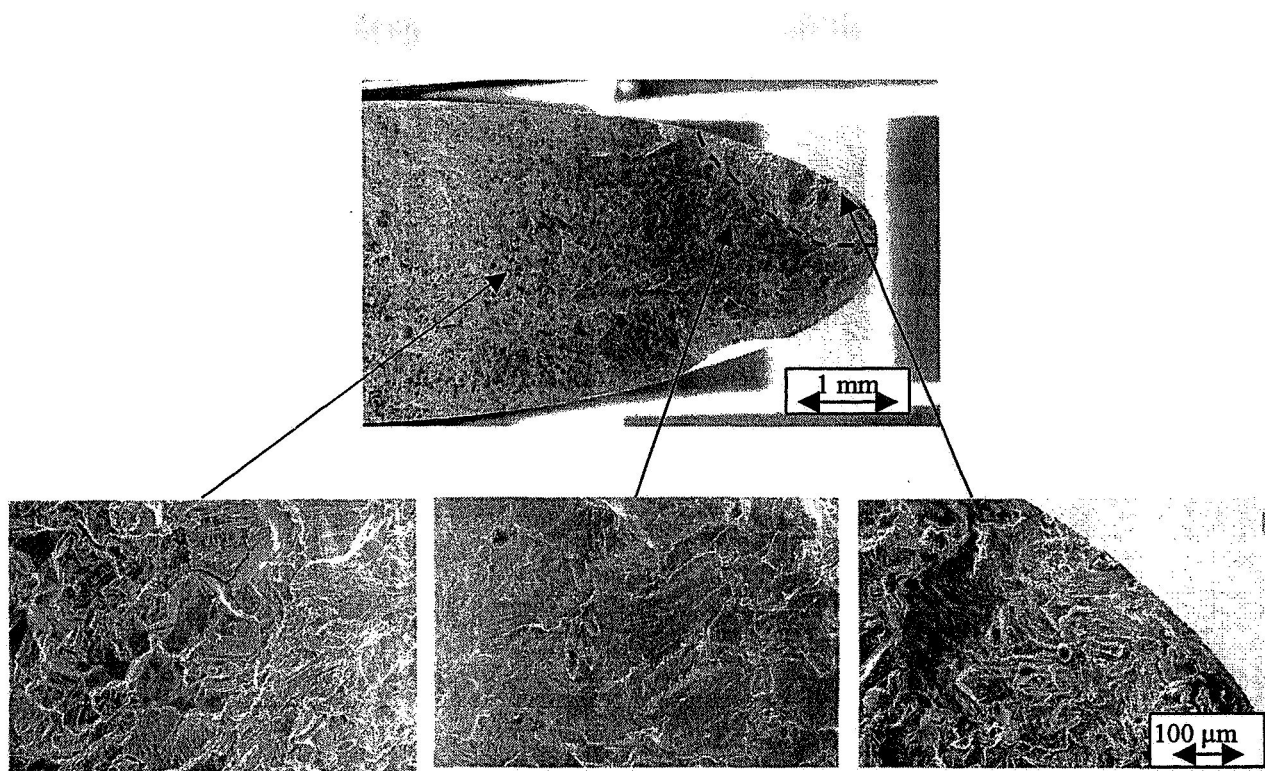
Fracture morphology change across the surface of a backside initiated fatigue sample.
